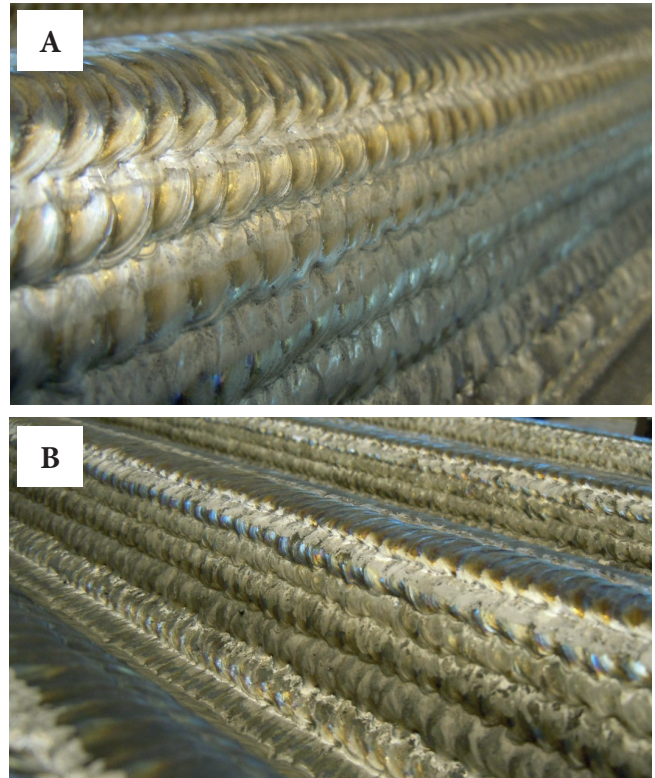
Two different surfacing welds made by the CMT method
